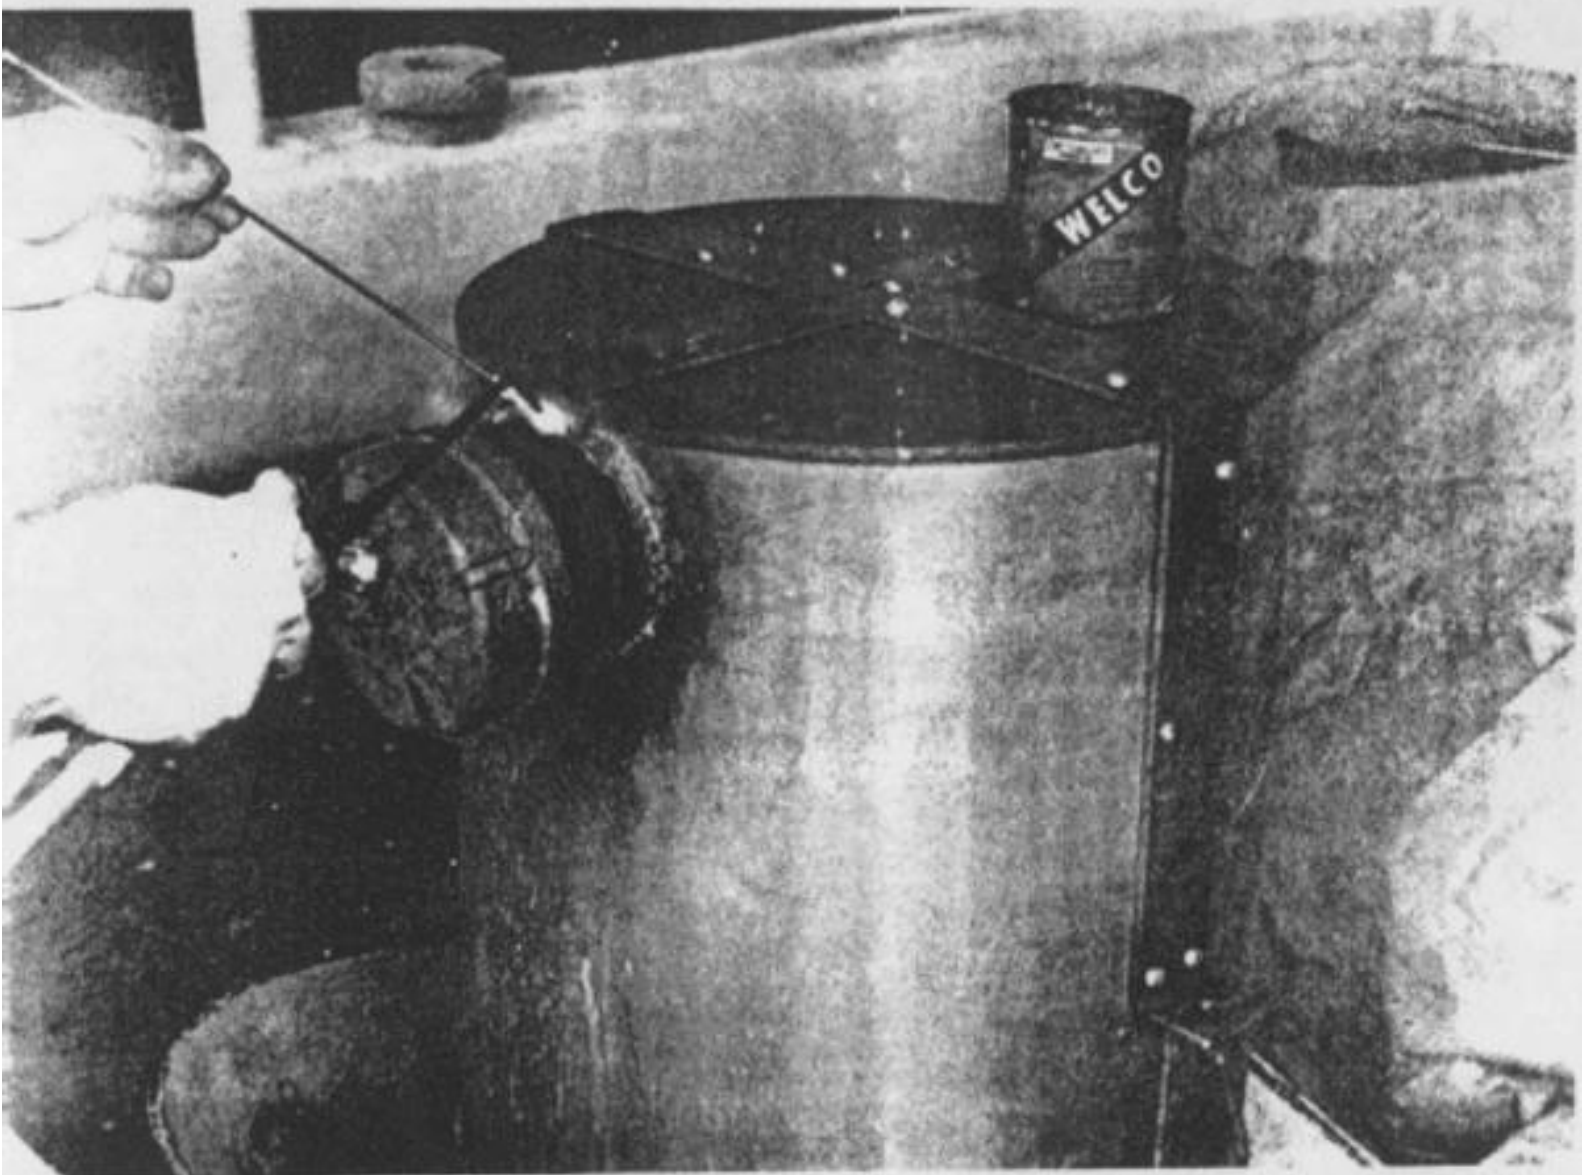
The support frame can be brazed or bolted to the side of the gasifier unit. All bolts should be sealed air tight.
